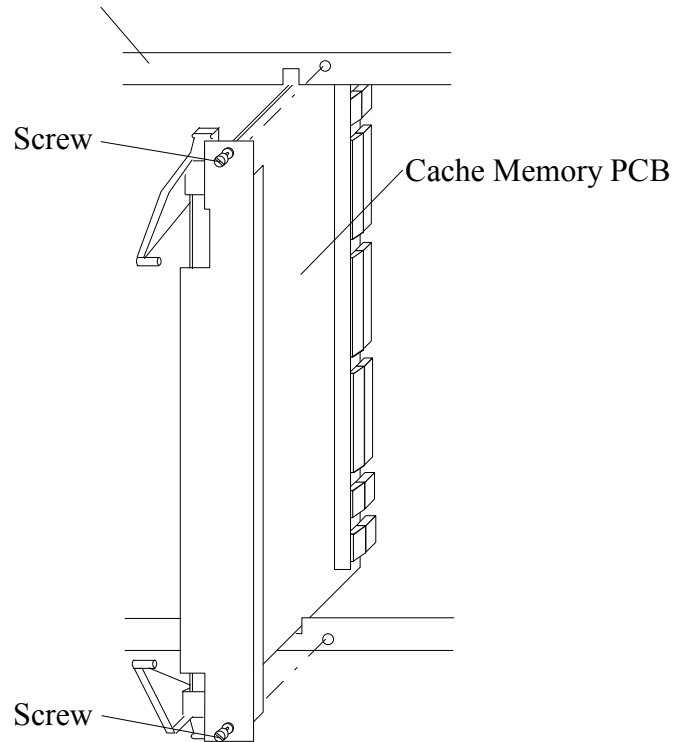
Removal of the Cache Memory PCB
